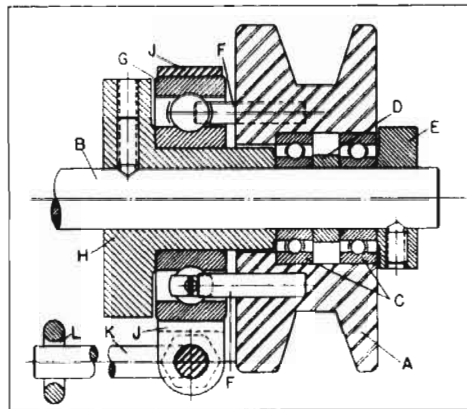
This drive mechanism makes use of a ball bearing *G* to serve in the capacity of a reducing planetary gear unit.
